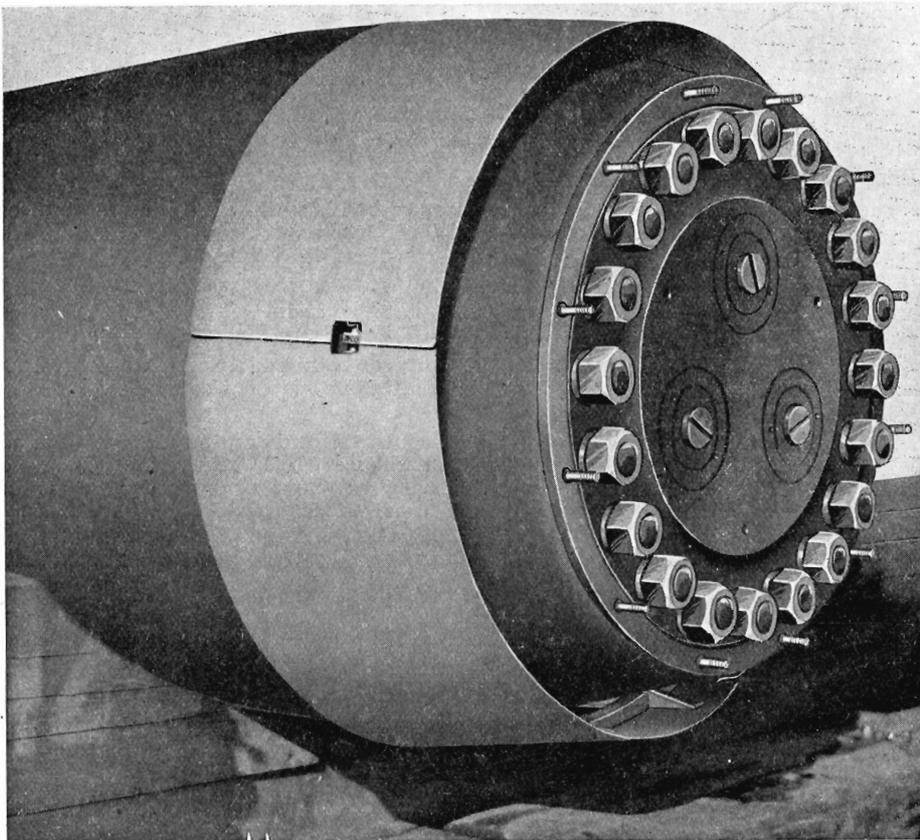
View showing fairing in position on bomb body prior to fitting tail unit
